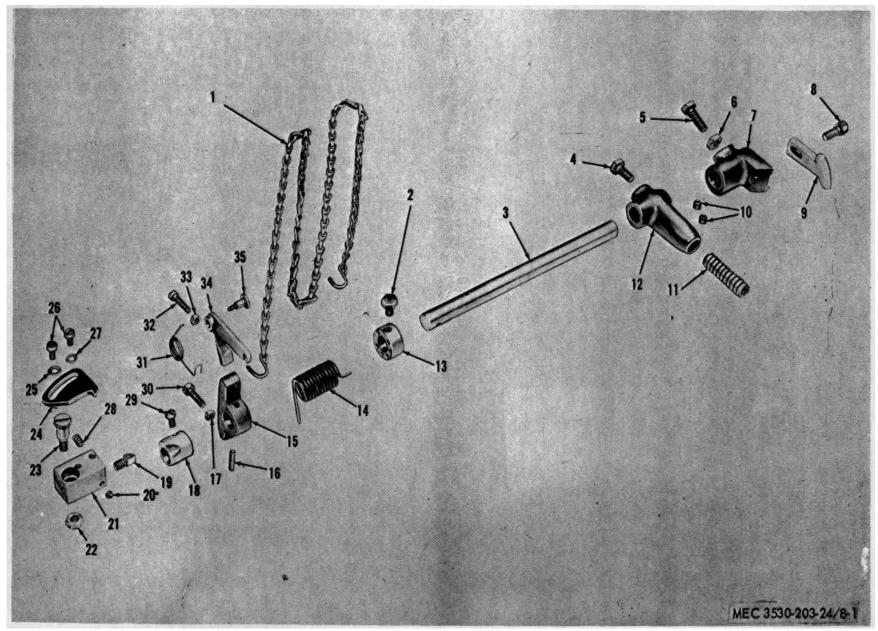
Pulley shifter, stop motion shaft, and trip block
